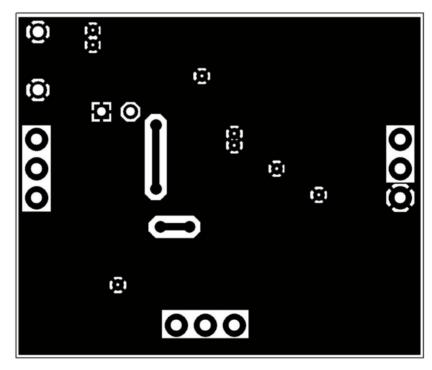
Atmel ATA6663/ATA6664 Development Board; Bottom Side, Top View (Transparent PCB View)
